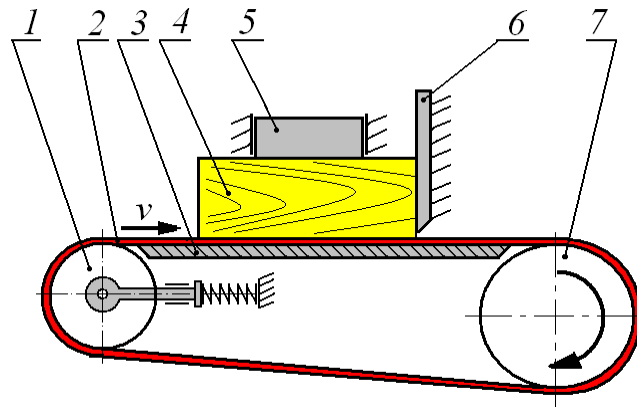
Principal scheme of sanding stand: 1 – tension roller; 2 – sanding belt; 3 – table; 4 – sample; 5 – weight; 6 – support; 7 – driving roller
